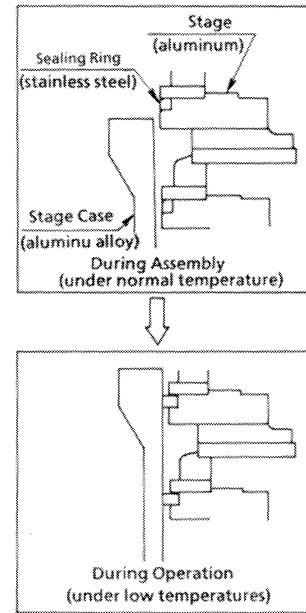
Sealing Structure of Single-Wall Cylindrical Case Housing.
